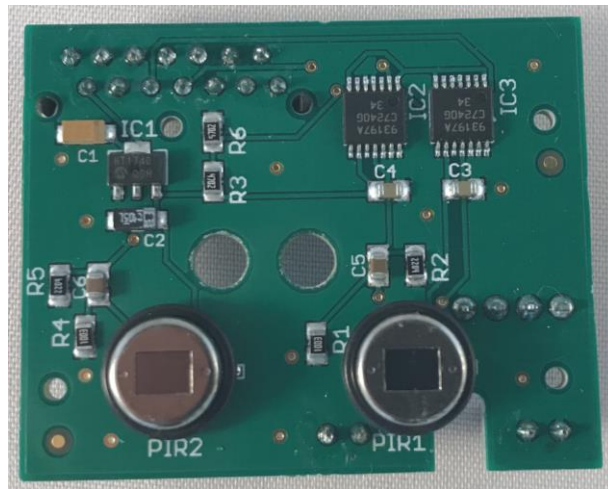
Elevator PCBA seen from the front with 2 PIR sensors.
